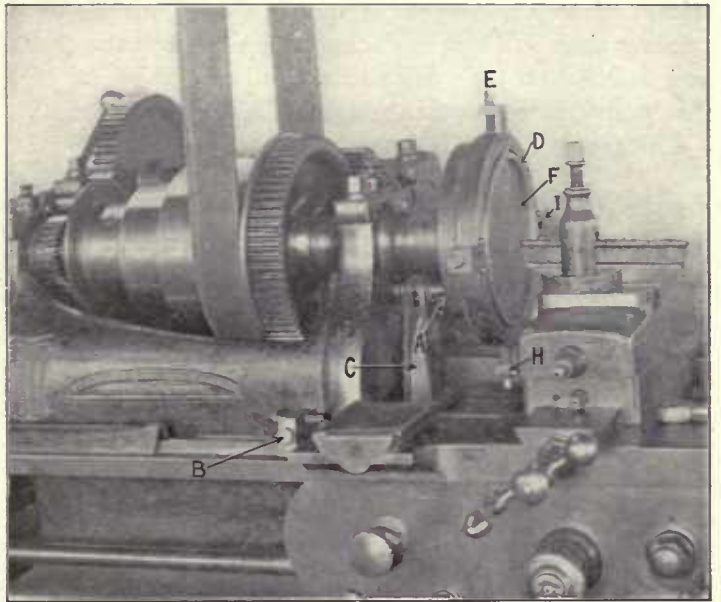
Magnetic Chuck for Finishing Packing Rings.
